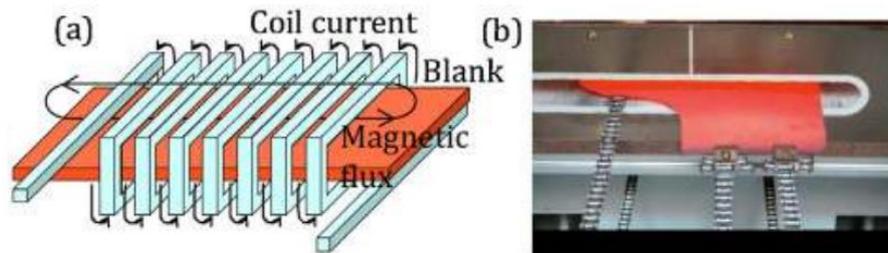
a) Principle of induction heating; b) Induction-heated blank for press hardening.
